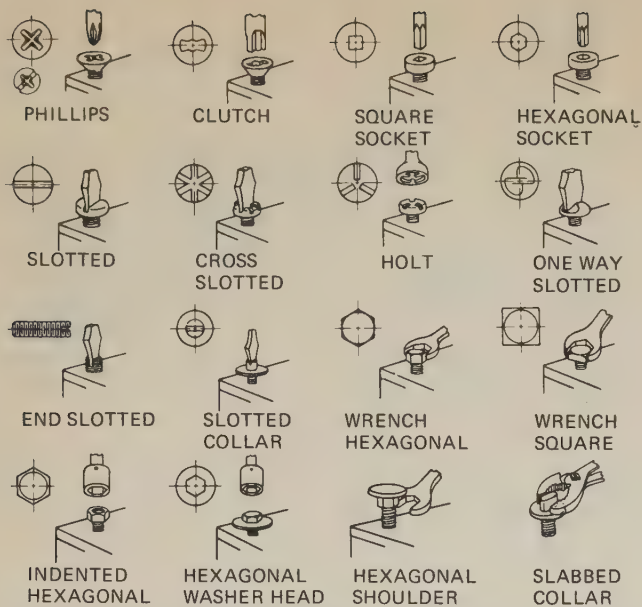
Types of screwdrivers and wrenches required to drive various kinds of screws.
